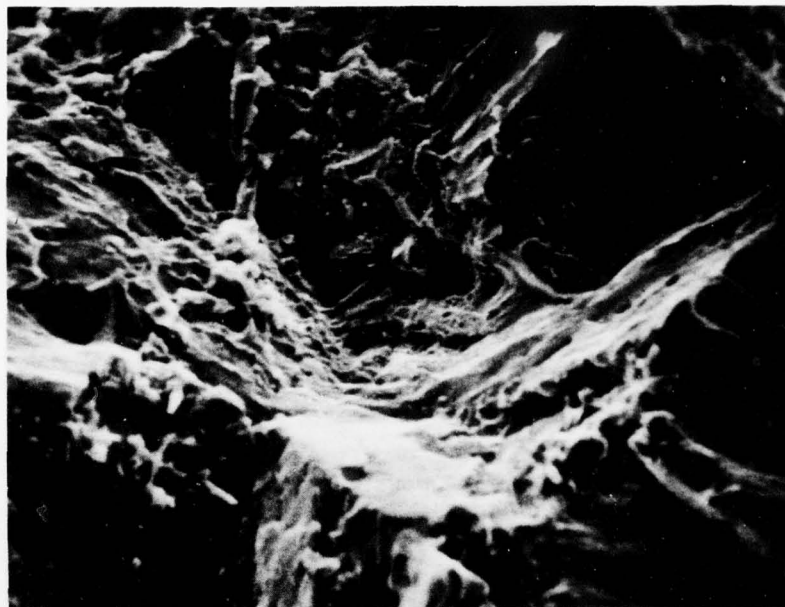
Sustained Load Crack Growth Fracture Surface of Specimen B-1-7
